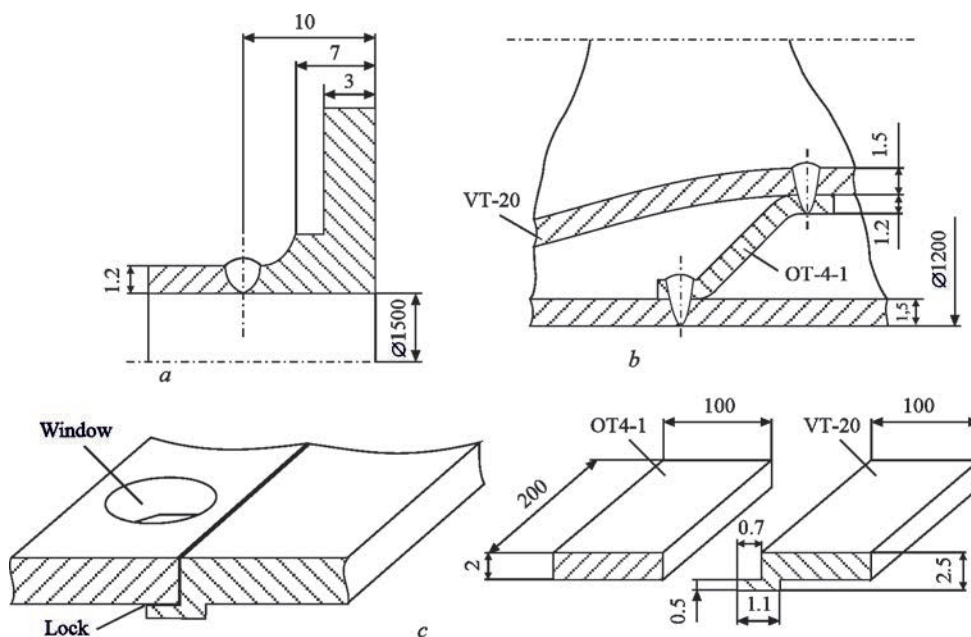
Schemes of fragments of welded units: frame ring-flange (non-symmetric heat removal), butt joint of OT-4 alloy (*a*); frame ring with overlapped spot joints of OT-4 and VT-20 alloys (*b*); frame ring with window, butt lock joint of OT-4 and VT-20 alloys (sketch (left) and elements (right) of welded joint) (*c*)
